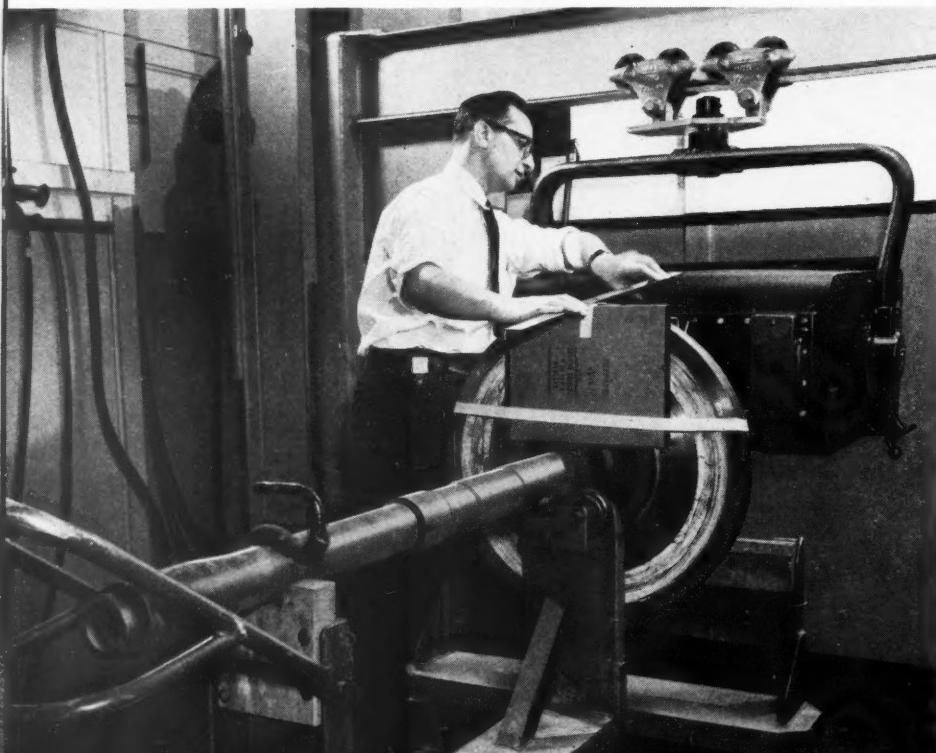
A 250,000-volt X-ray machine is employed to inspect the entire periphery of the welded joint to insure soundness, proper degree of weld penetration, and uniformity of structure
